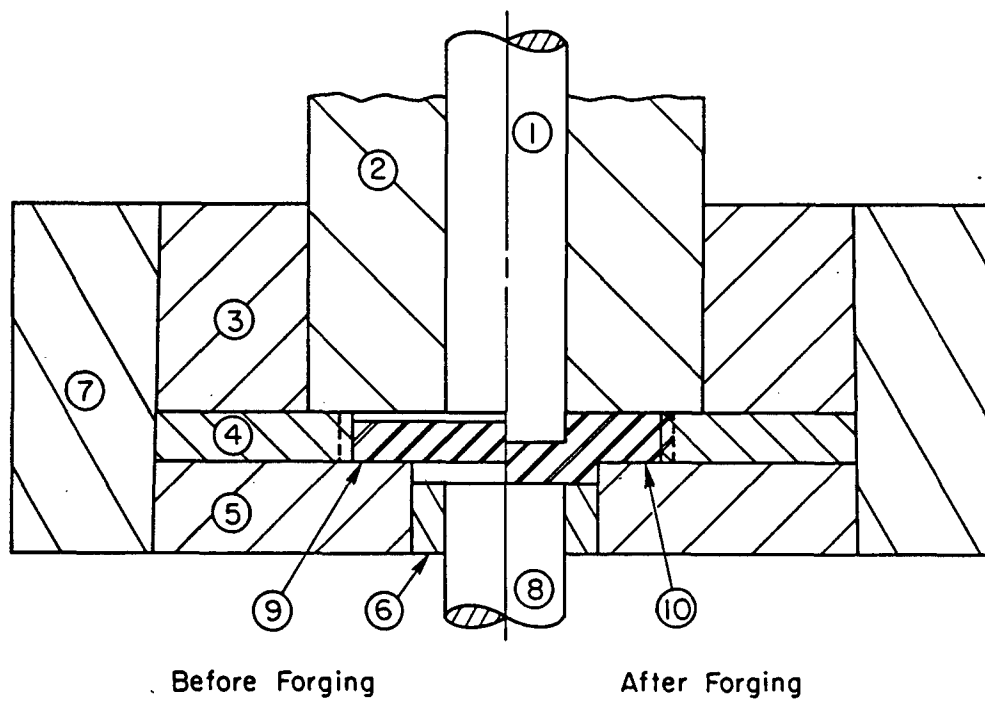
Double-action Tooling for Forging of Spur Gears
